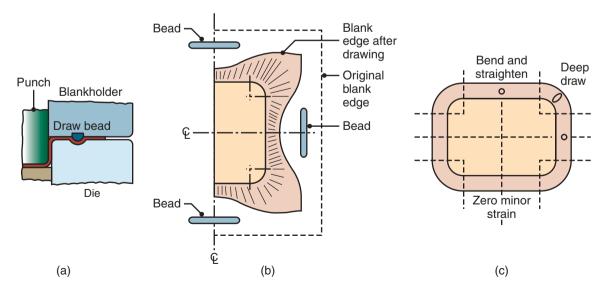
(a) Schematic illustration of a draw bead. (b) Metal flow during the drawing of a box-shaped part while using beads to control the movement of the material. (c) Deformation of circular grids in the flange in deep drawing.
